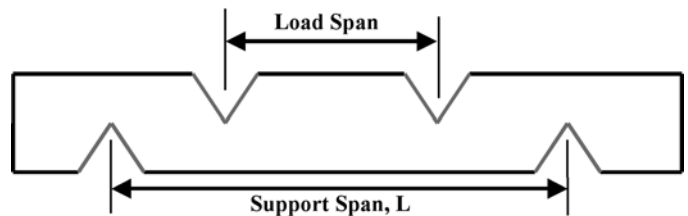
Fixture Used to Align Loading Noses and Supports
